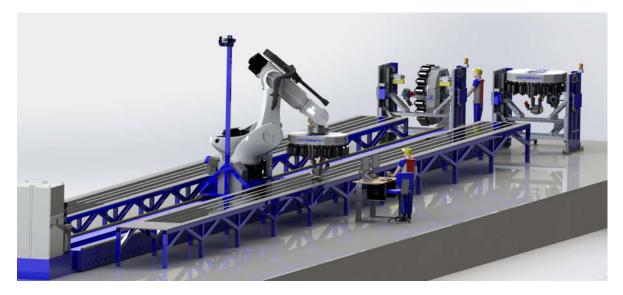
Robotic AFP stringer charge cell with two vacuum tables, ultrasonic cutting head, head change stands, and laser projection.
